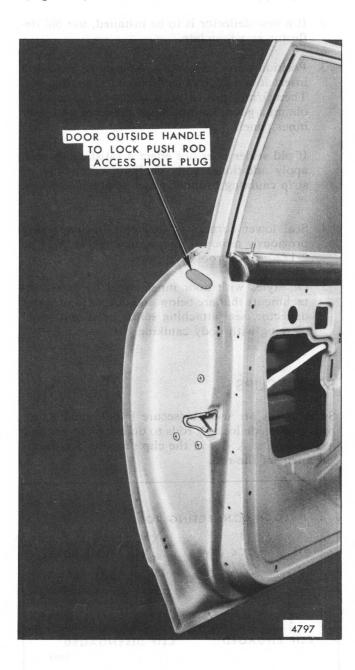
Outside Handle Push Rod Access Hole Plug - "H"
